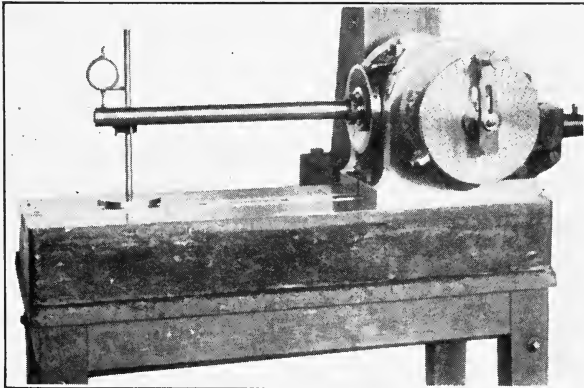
Testing the alignment of the spindle of a milling machine dividing head.
